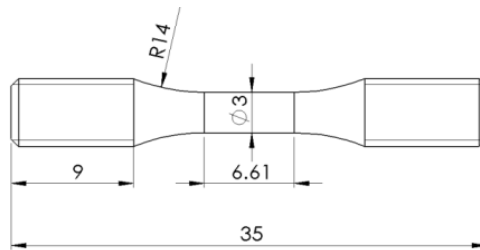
Geometry and dimensions of the specimen for dynamic tensile tests
